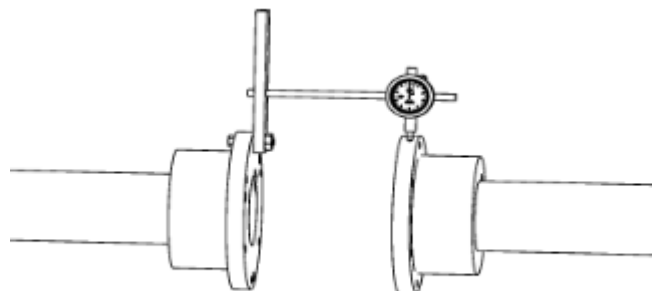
Checking parallel alignment with dial indicator on coupling flange.
